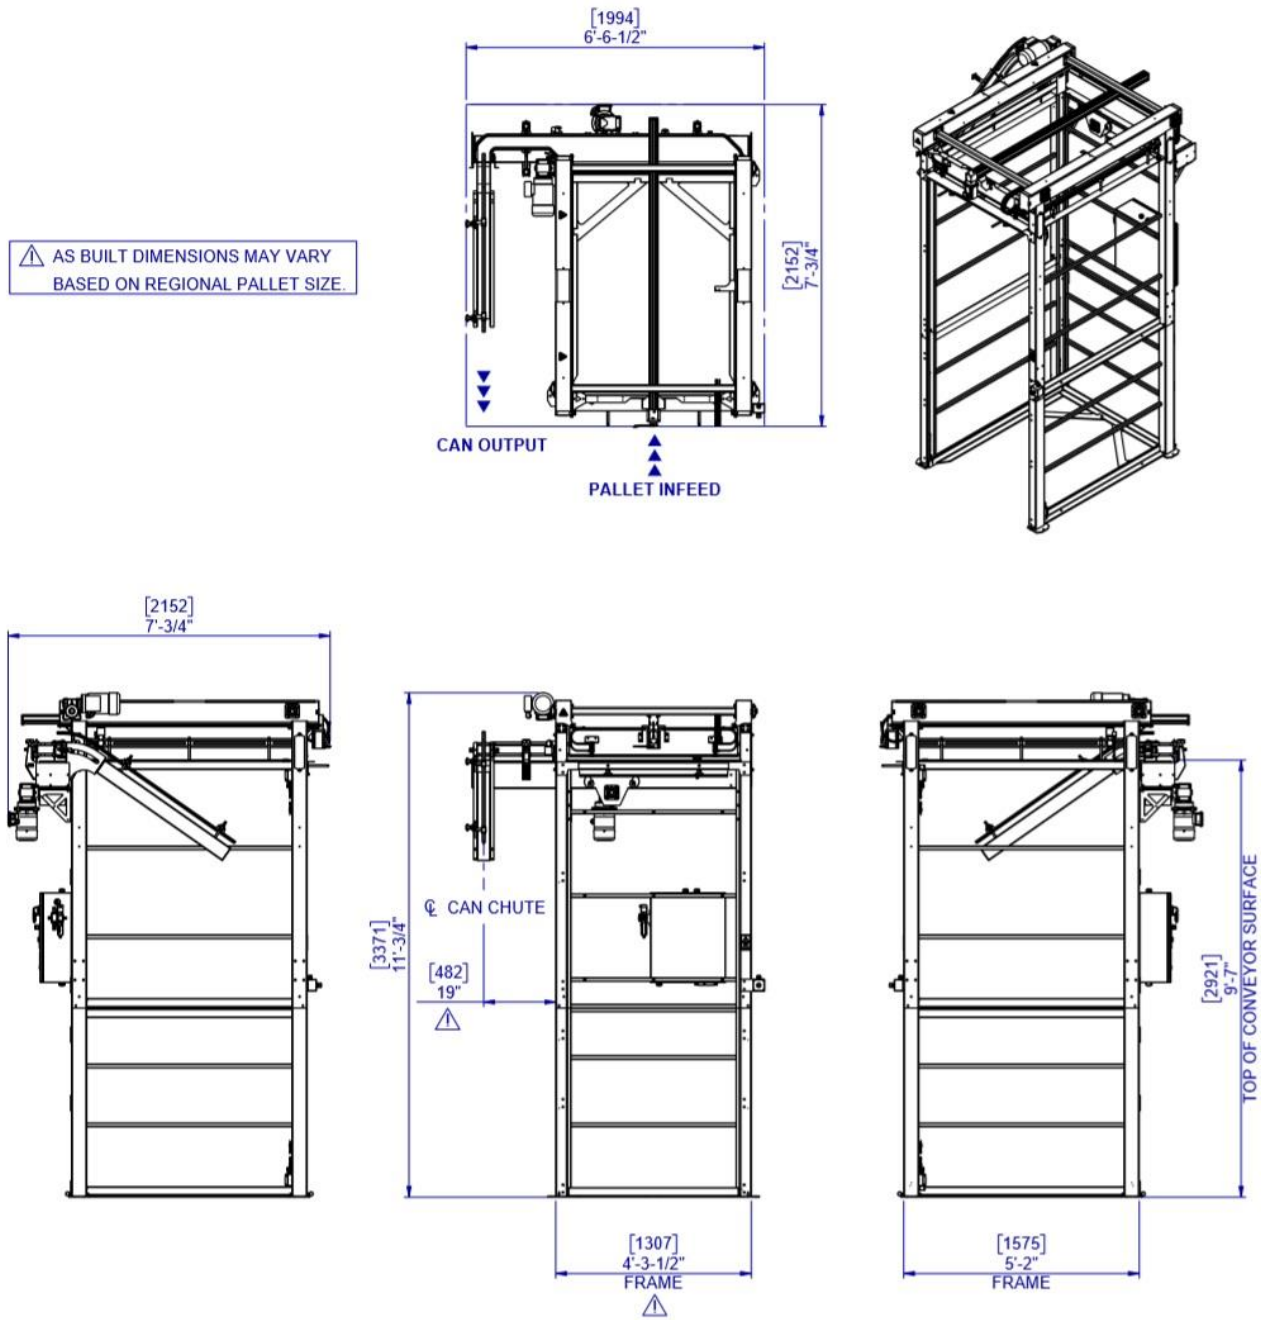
Automated Depal V3.0 Unit Diagram & Dimensions
